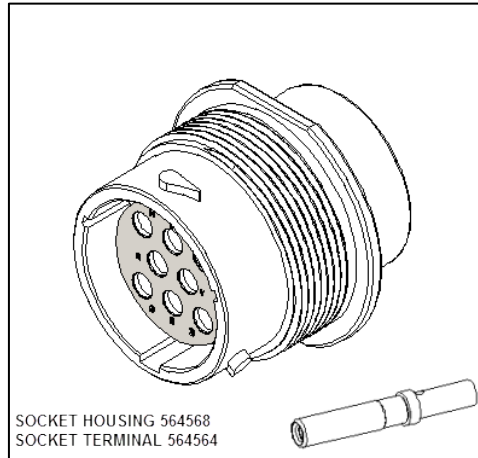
TYPICAL SOCKET HOUSING AND TERMINAL
